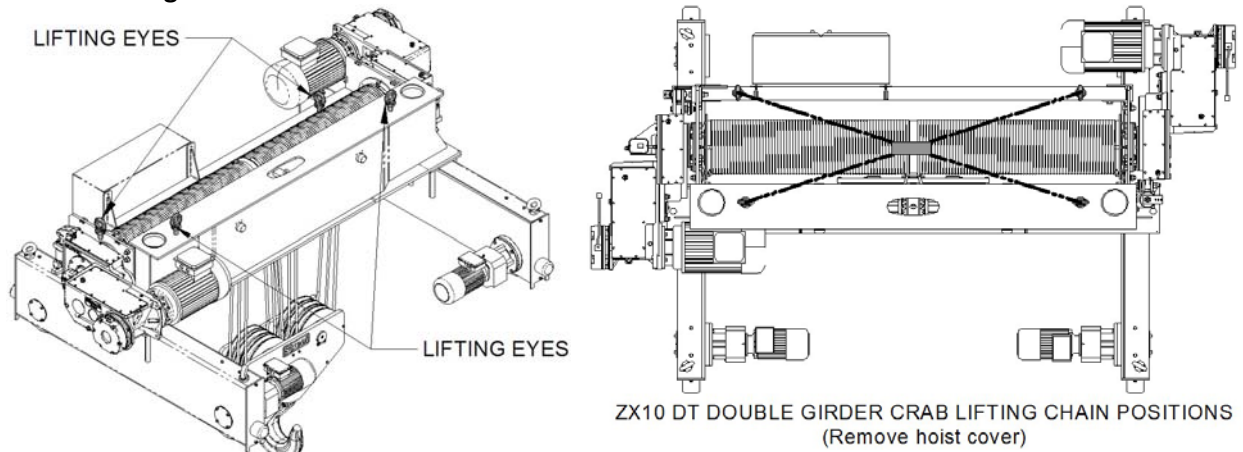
Double Girder Crab Lifting Eyes- 4,8 & 12 fall units
